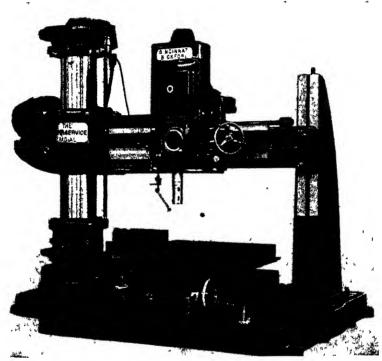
Universal adaptation of radial dull for jig and fixture type of work
